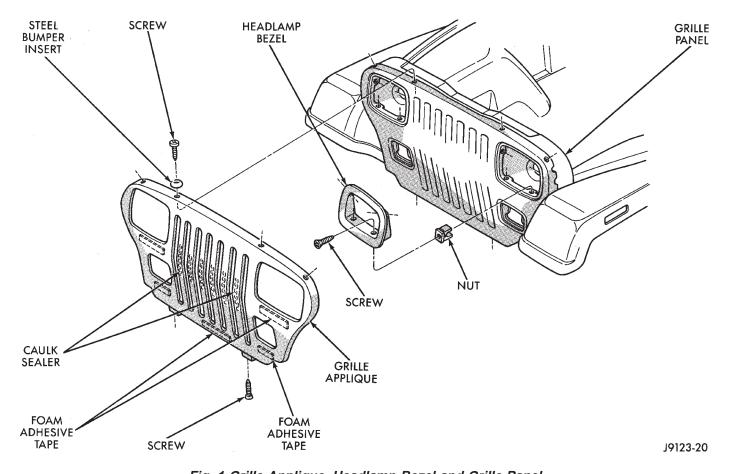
Grille Applique, Headlamp Bezel and Grille Panel RADIATOR GRILLE PANEL
